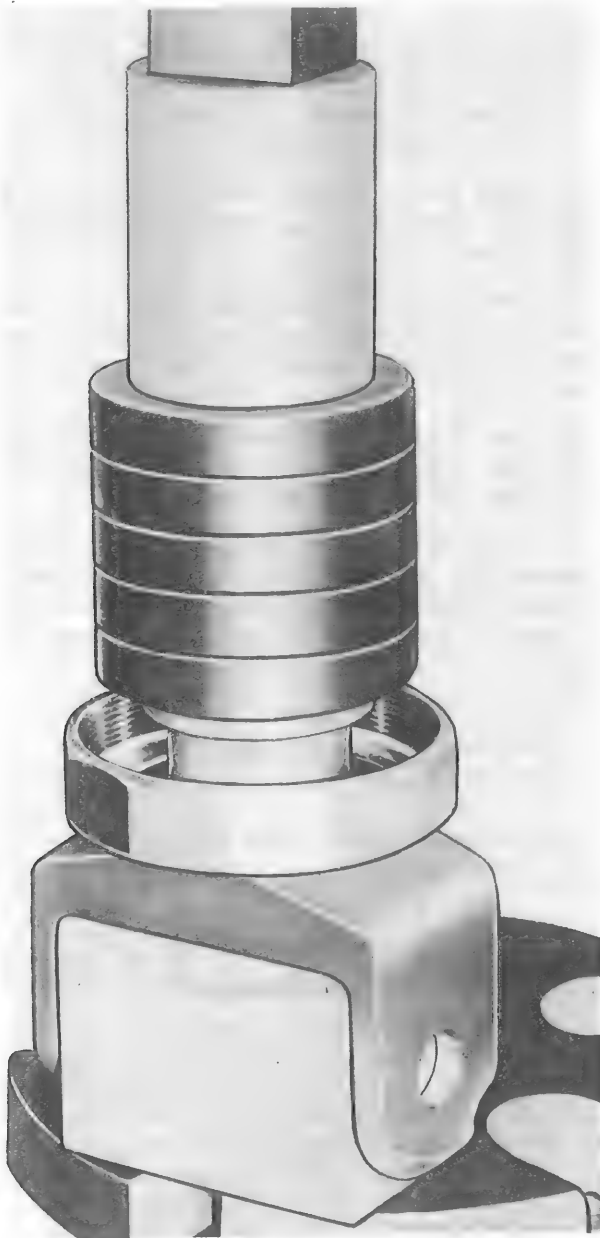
Pressing Stack Bearing Assembly on Spindle
